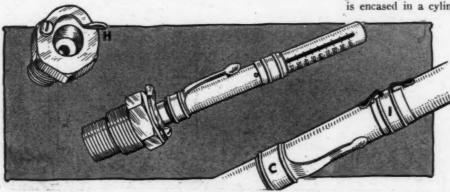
Allen compressometer nut and clip springs for holding indicator to tyrometer and pocket
